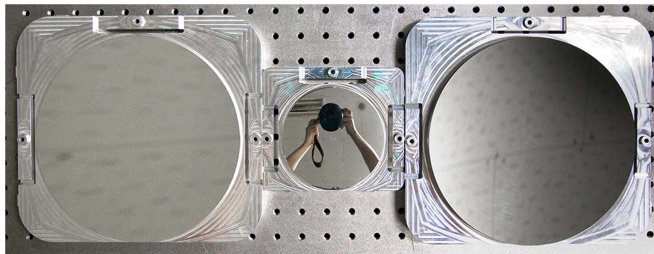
Fabricated freeform 6061-T6 aluminum mirrors: (left) M1, (middle) M2, and (right) M3.
